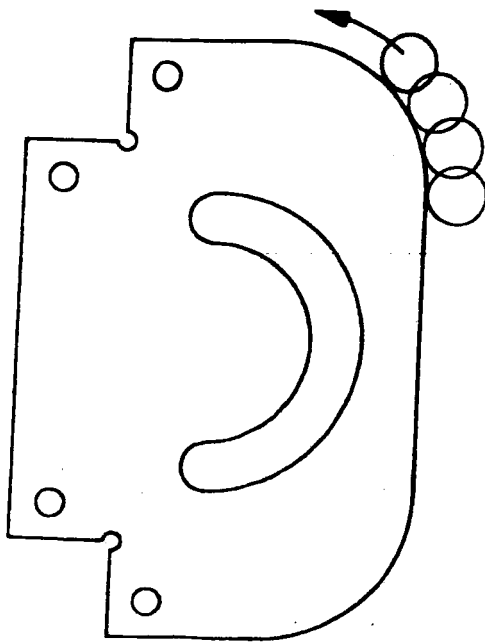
Part geometry which requires nibbling or profile cutting.
